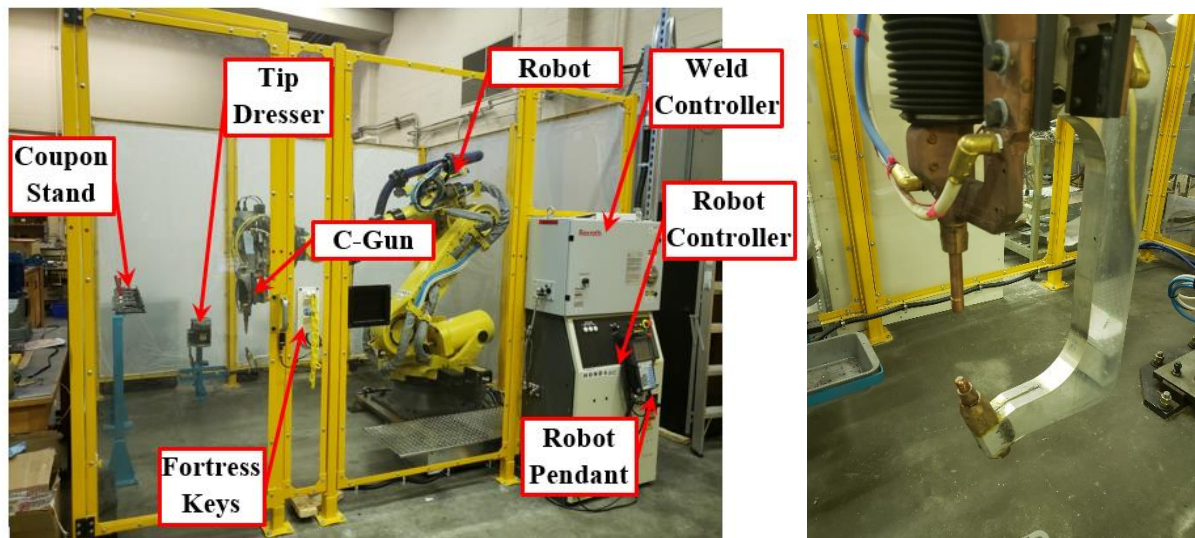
Robot Spot Welding Cell (Left) and C-Gun (Right)
